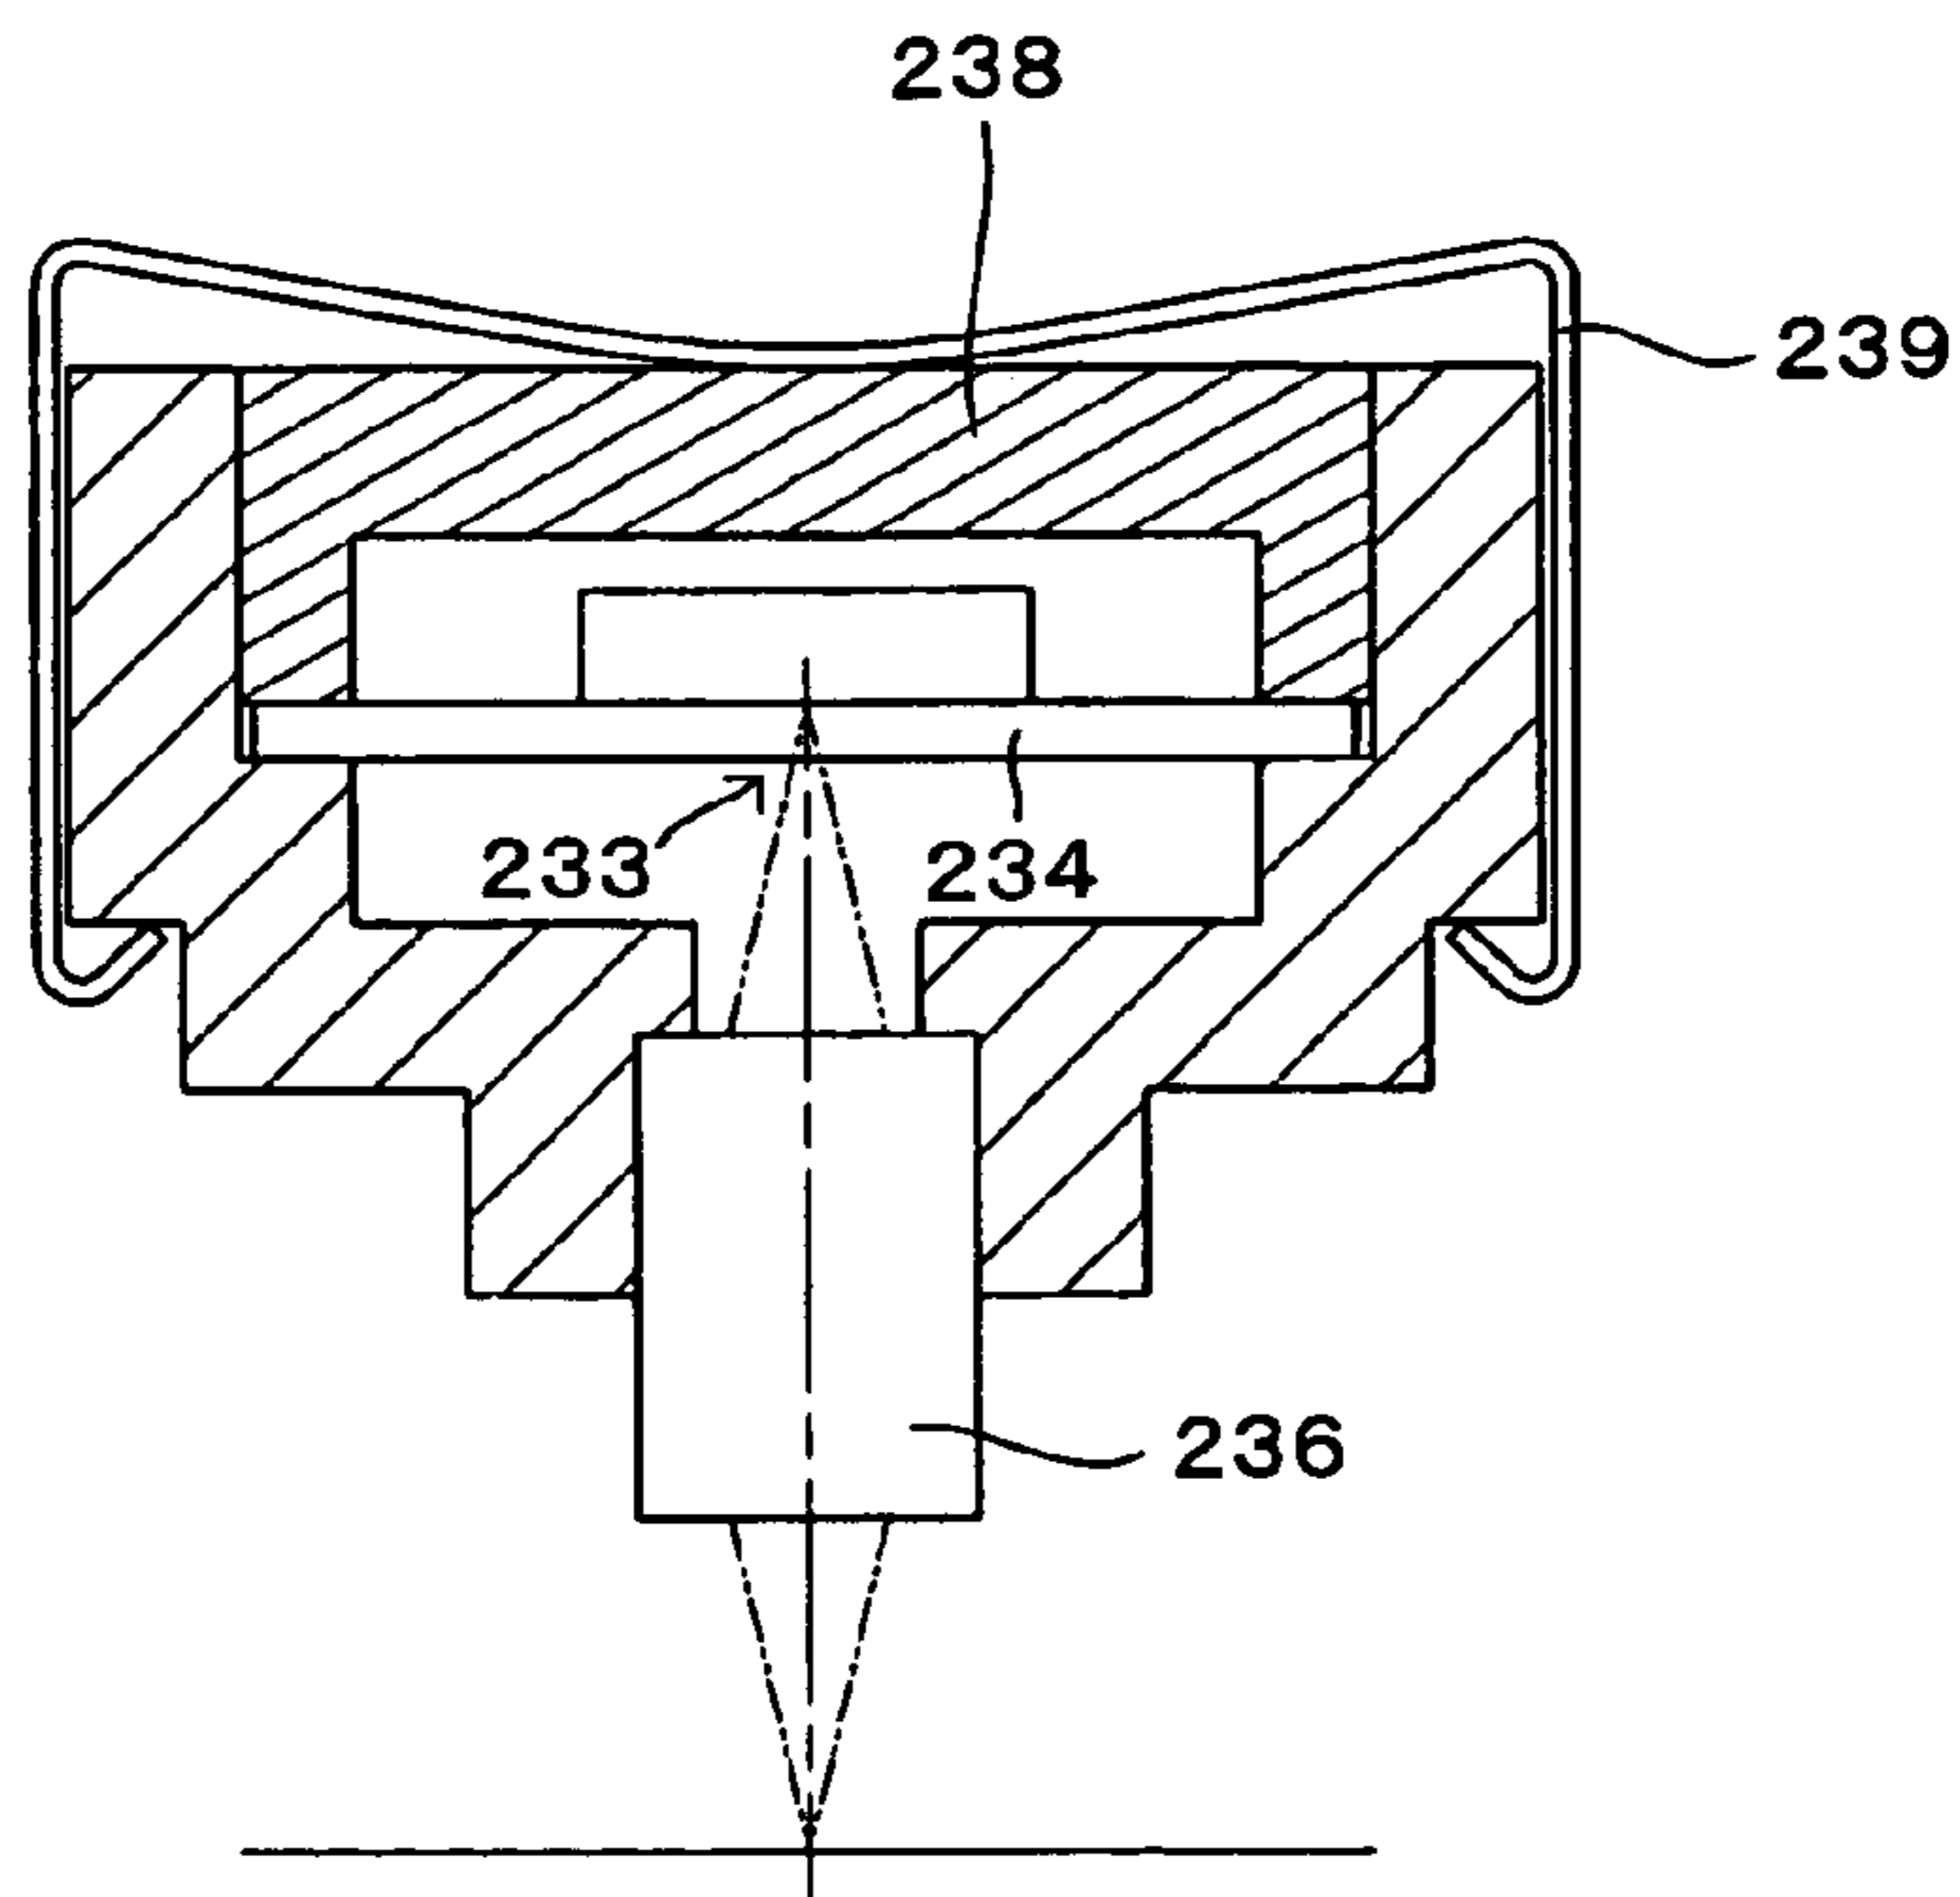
A : ENLARGED PERSPECTIVE VIEW OF SECTION NEAR SENSOR
